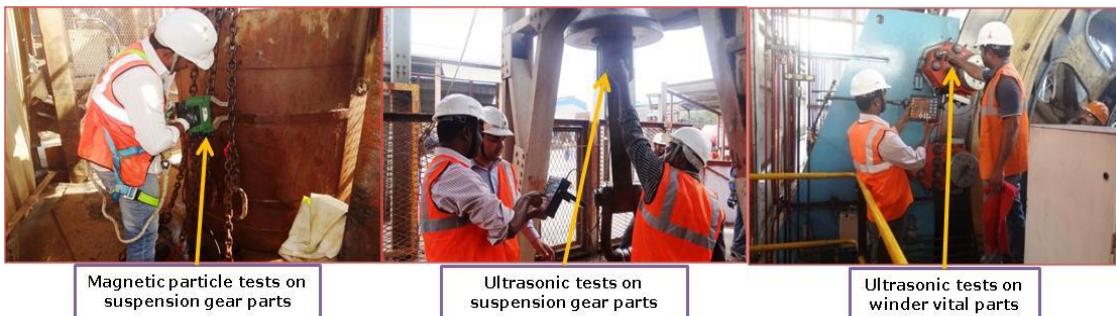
NDT on winder vital components & suspension gear parts, M/s SSM
